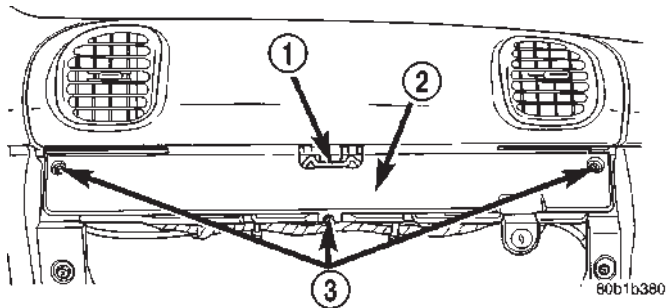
Glove Box Opening Upper Trim Remove/Install
